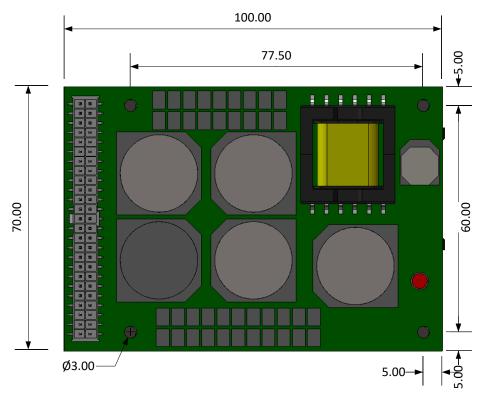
TEM Fixing Details *All dimensions in millimetres
